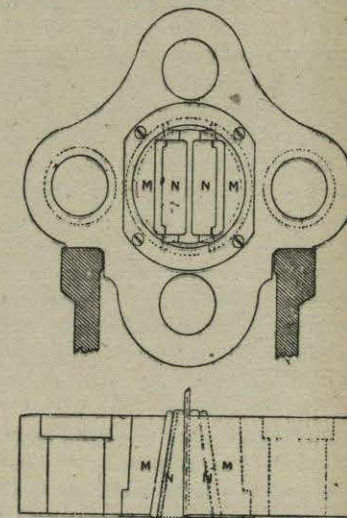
Gripping-box Showing Taper Wedges for Holding Specimen.
